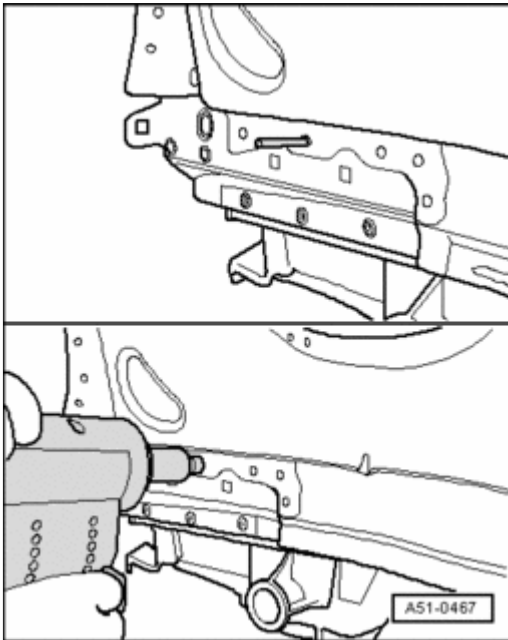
Pulling Out Bolts With VAS 2003 And Mouthpiece VAS 2003/1
